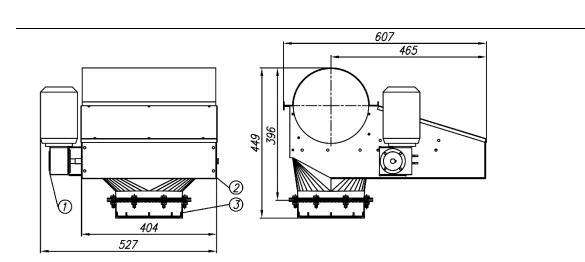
PSU220-ZASUW_1 + PSU220-ZASNAP1-screw conveyor -220 - an outlet shutter of the screw conveyor with the electrical motor
